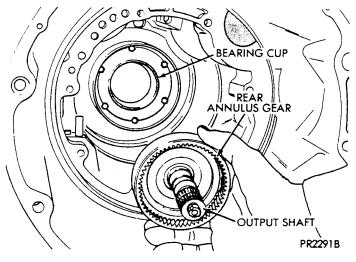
Remove Output Shaft and Rear Annulus Gear Assembly
